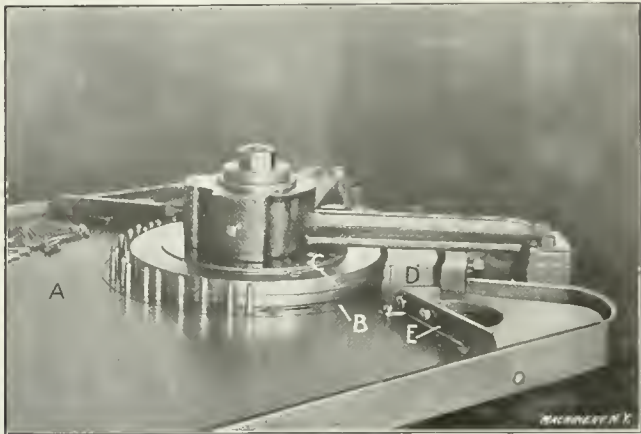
Canneluring Machine for Forming the Grooves in the Bullet
